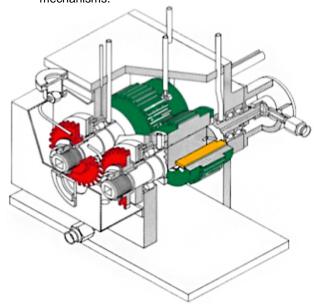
Cross-sectional sketch of the test gearbox used for loss of lubrication testing.
